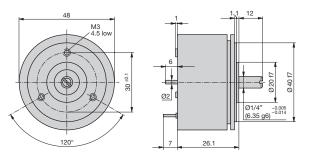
KINAX 3W2 with special drive shaft at front and at rear. At front: Ø 1/4", length 12 mm. At rear: Ø 2 mm, length 6 mm.
